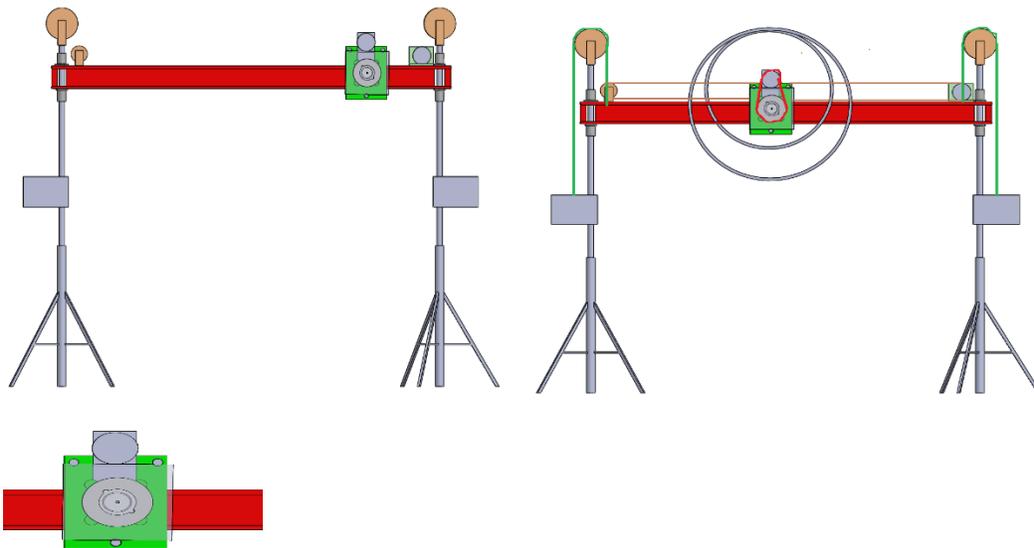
(Top Left) Concept drawing of the Gantry Arm Design. The trolley car moves along the X-Axis (red beam) left and right. (Top Right) Concept drawing of the Gantry Arm design showing the Y-Axis allowing it to adjust for the various size wreaths. (Bottom Left) Z Axis rotary end effector mounted to the trolley car.
